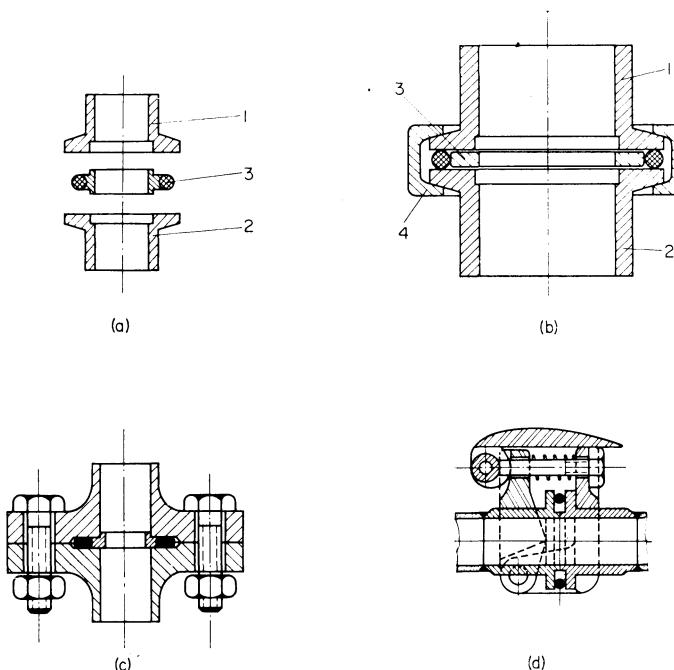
Small flange connexions with retaining ring: (a) joint supplied by Leybold⁷⁶²; (b) joint supplied by Heraeus⁵⁴²; (1, 2) identical small flanges; (3) retaining ring; (4) clamping ring; (c) unit flange connexion supplied by Leybold⁷⁶²; (d) Mecavide connexion supplied by Laboratoires des Basses Pressions⁷²⁸
